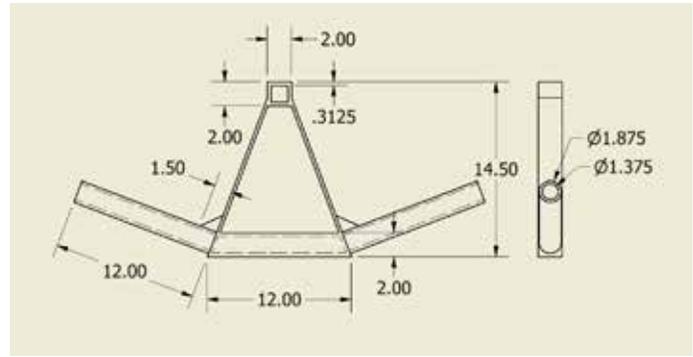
Welded metal frame used for testing concrete beams.
